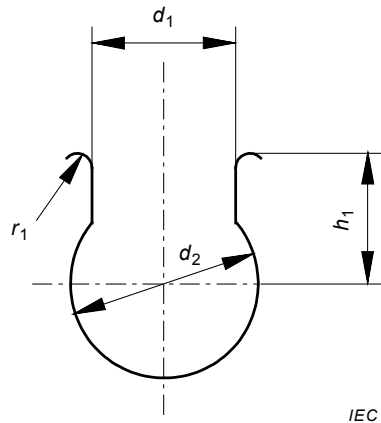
Dimensions of NOT GO gauges for ball couplings
